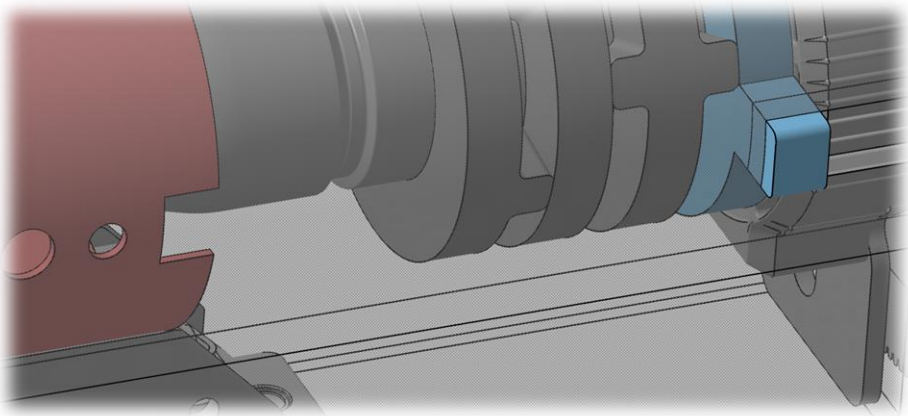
The upper jacket is highlighted in red whilst the steering angle limiter with its mounting tabs are highlighted in blue.
